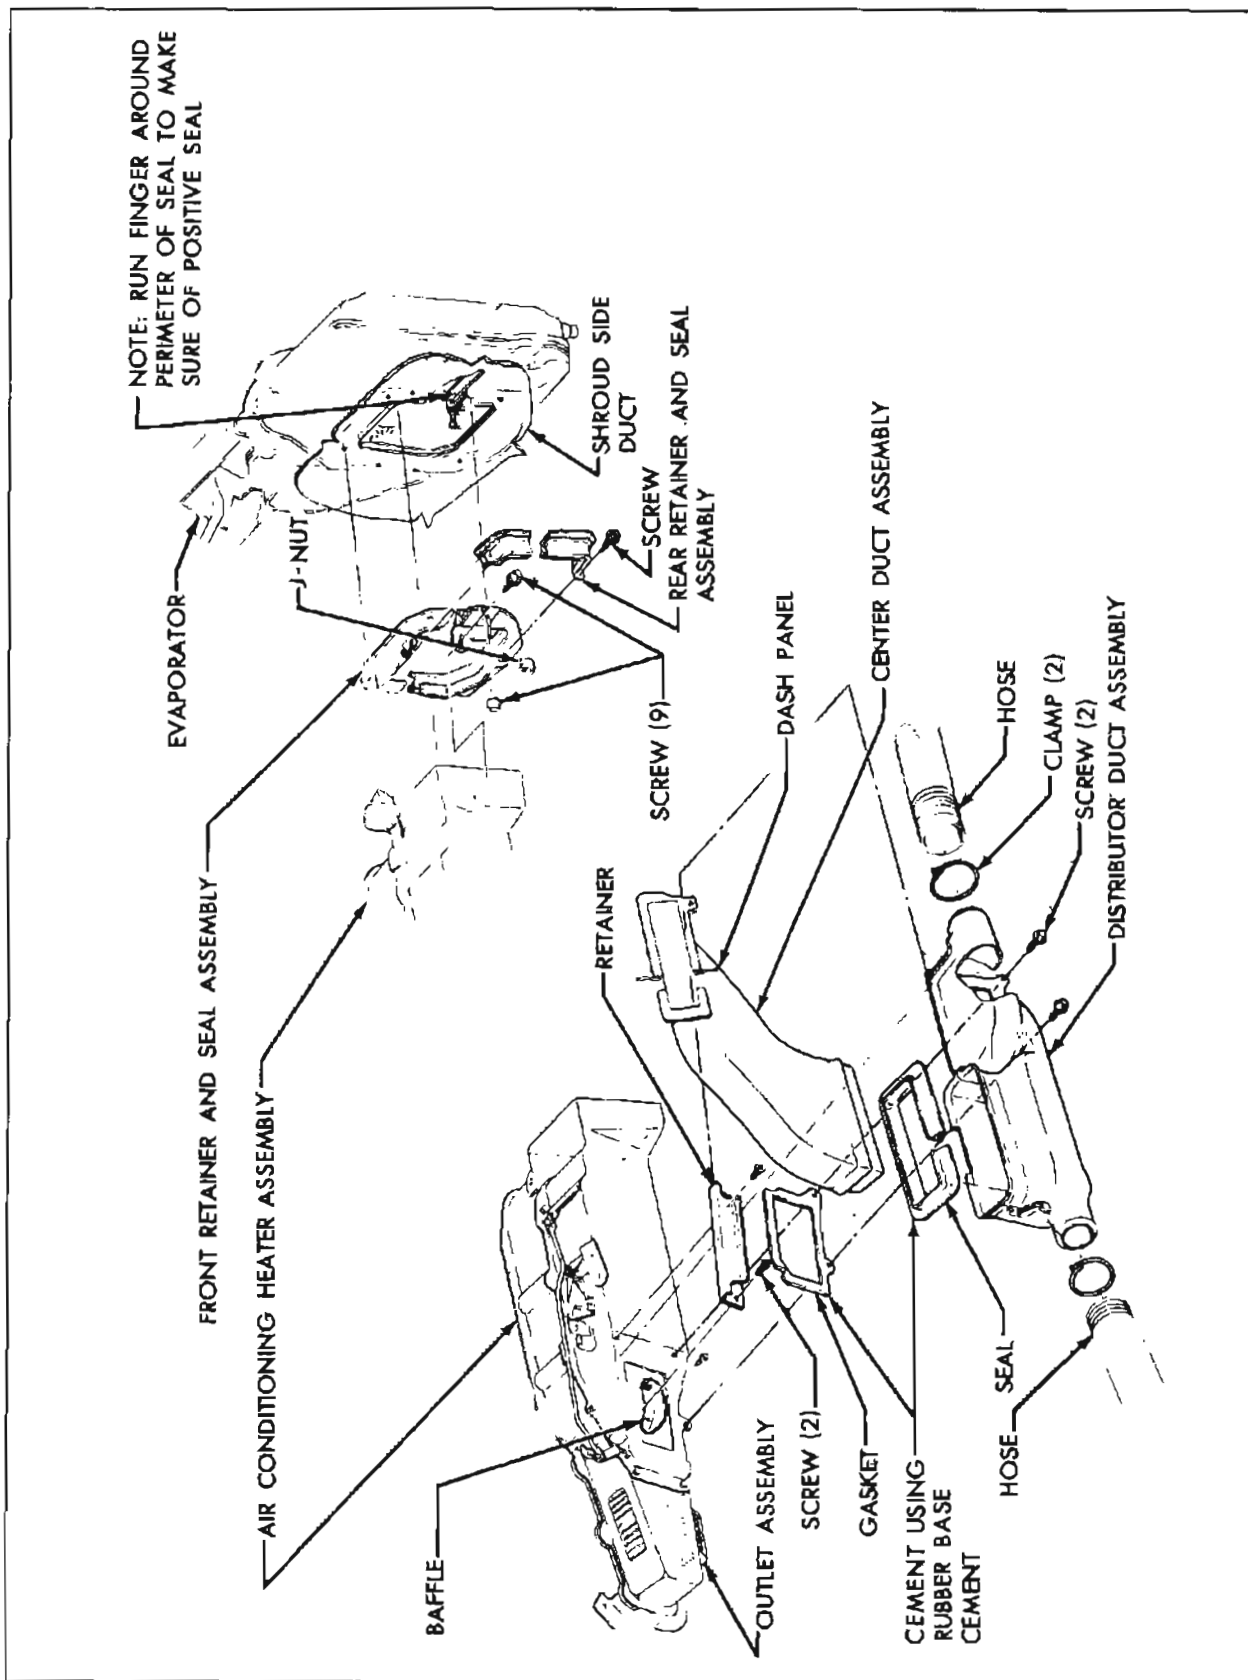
Distributor Duct Assembly, and Front Retainer and Seal Installation
